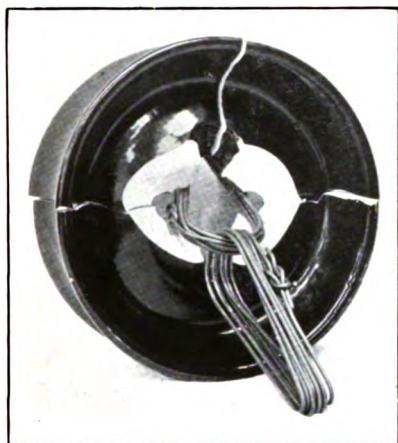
TYPE B—FRACTURE OCCURRED AT 8000 LB.
